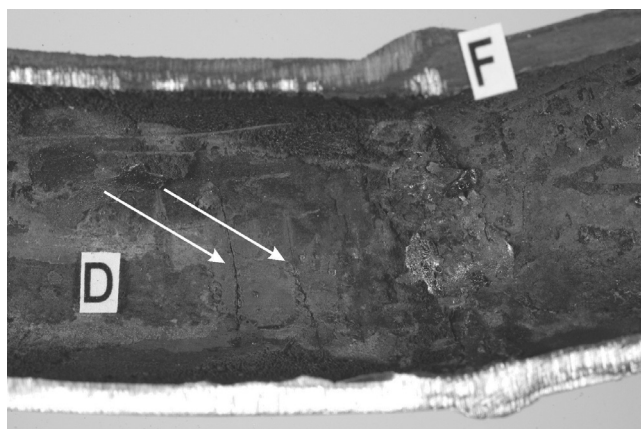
Cracks in the HAZ of the circumferential weld
